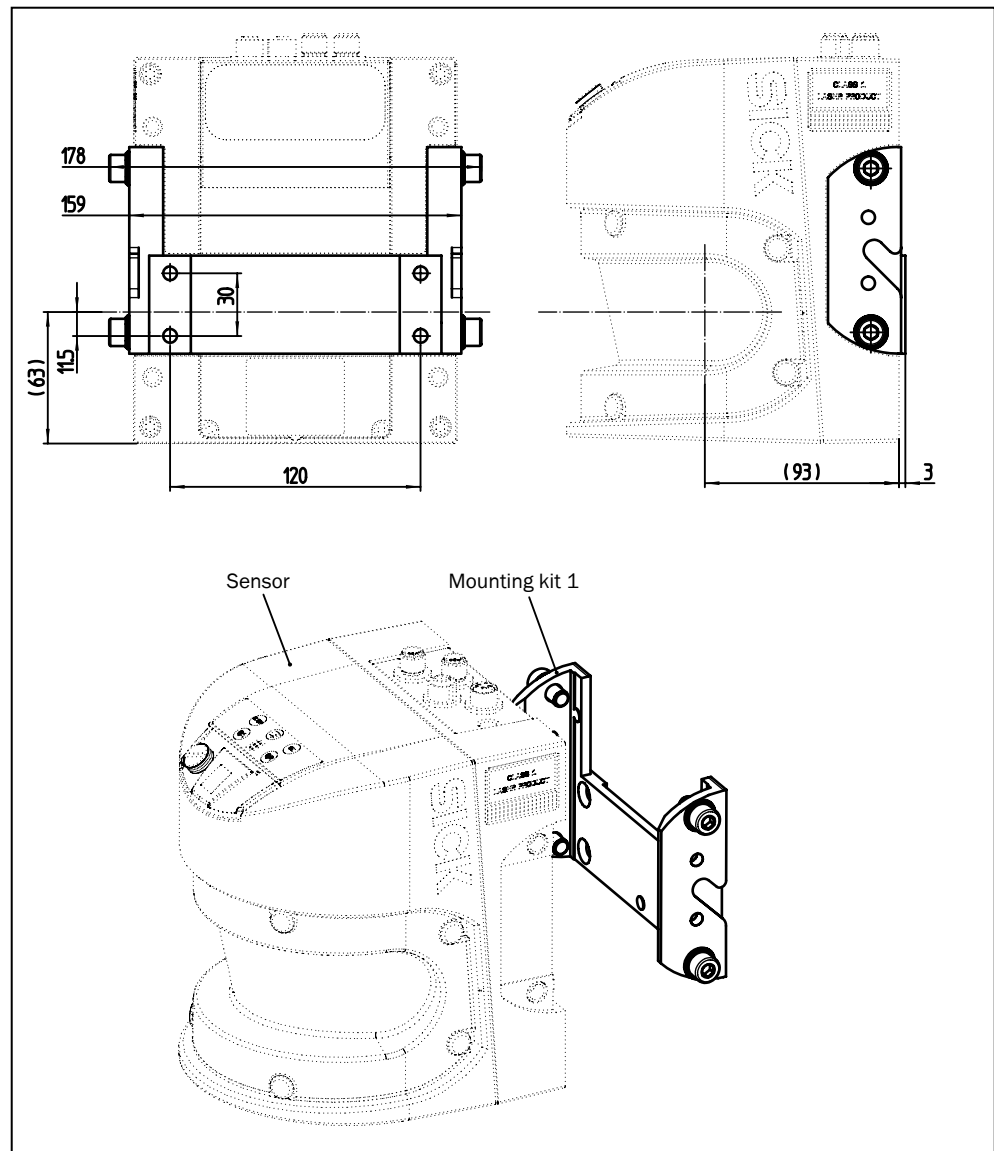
Dimensional drawing mounting kit 1 (mm)
